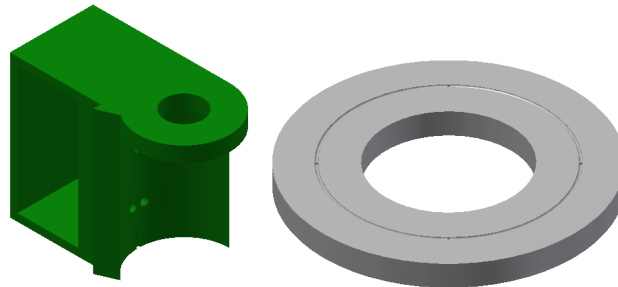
Electronics housing (left). Bolted to upper collar from inside housing. Lower welded ring (right). Drain holes prevent liquid and particulate buildup inside lacking mechanism.
